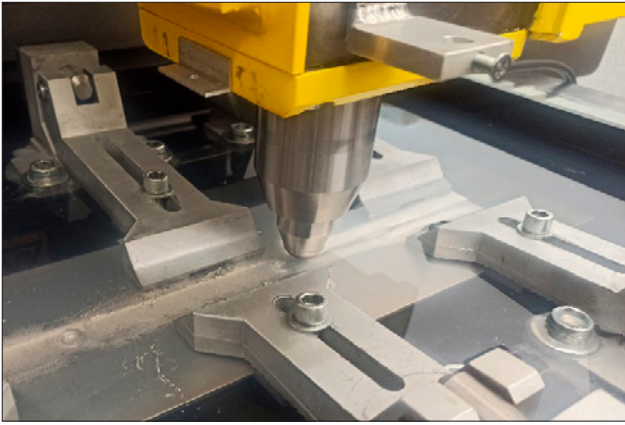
Underwater friction stir welded joint of aluminium alloy AA7075-T651
